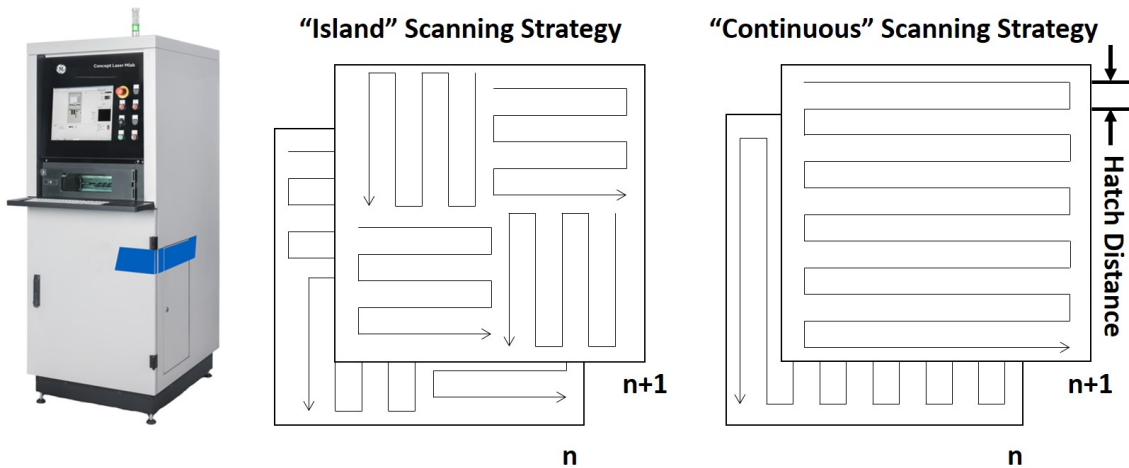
GE Concept Laser Mlab cusing R metal 3D printer used to print HFSB nozzles (left) and 3D printer scanning strategies that were implemented to print the HFSB nozzles (right)
